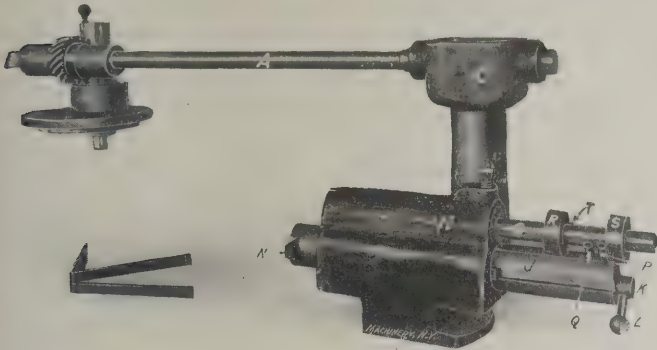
Chasing Attachment for the Flat Turret Lathe.
